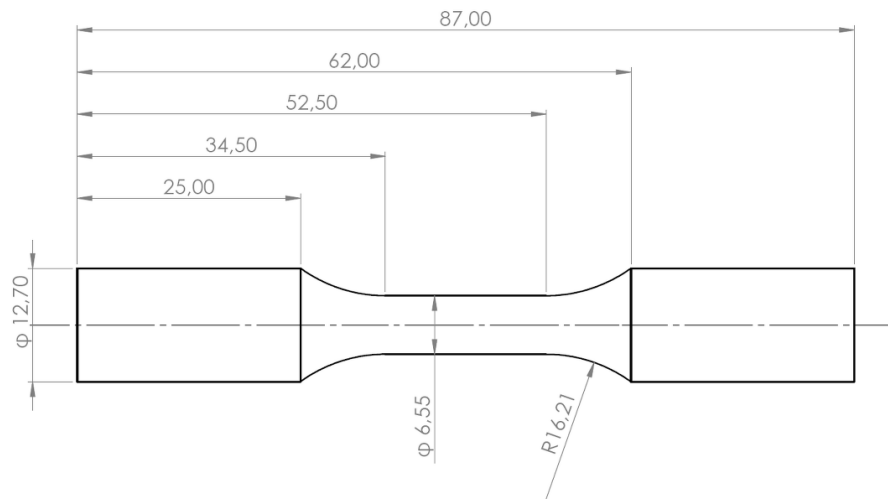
Test bar geometry machined in accordance with ASTM standards.
